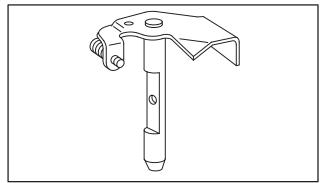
THROTTLE SHAFT AND LEVER, TYPICAL
